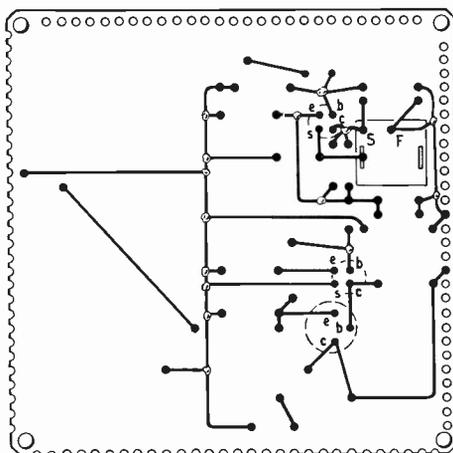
Component layout and wiring of the 2nd oscillator module
